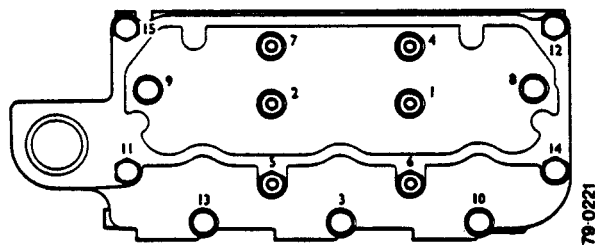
CYLINDER HEAD TIGHTENING SEQUENCE
